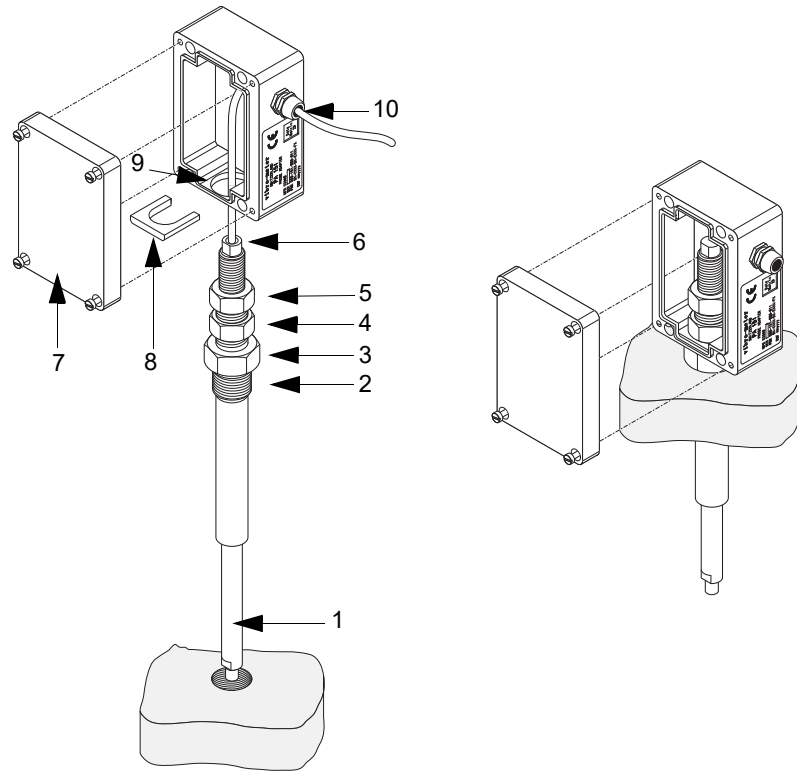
Mounting a PA151 or PA152 probe adaptor
